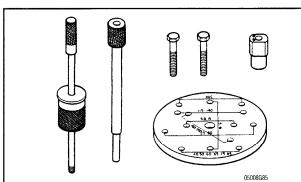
Drive the pinion needle bearing into the gearcase using the following special tools
